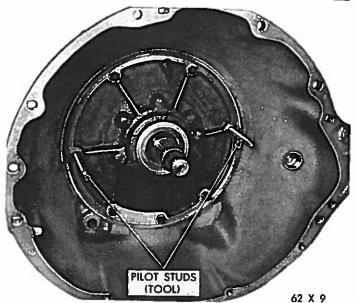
Installing Front Pump and Reaction Shaft Support Assembly (Tool C-3288)
